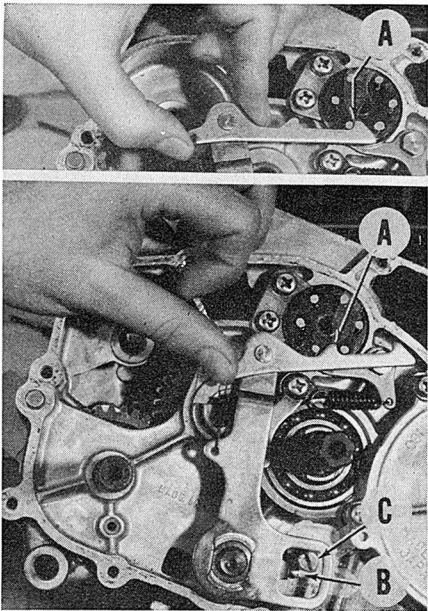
Clearance (A) must be equal and is adjusted by loosening lock nut (B) and turning eccentric pin (C). Remove return spring while making adjustment.
